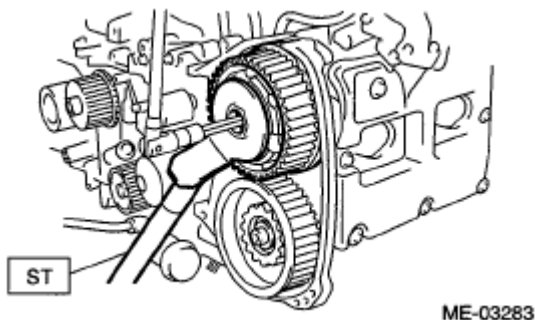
Removing/Installing Cam Sprocket Using ST 499977500
